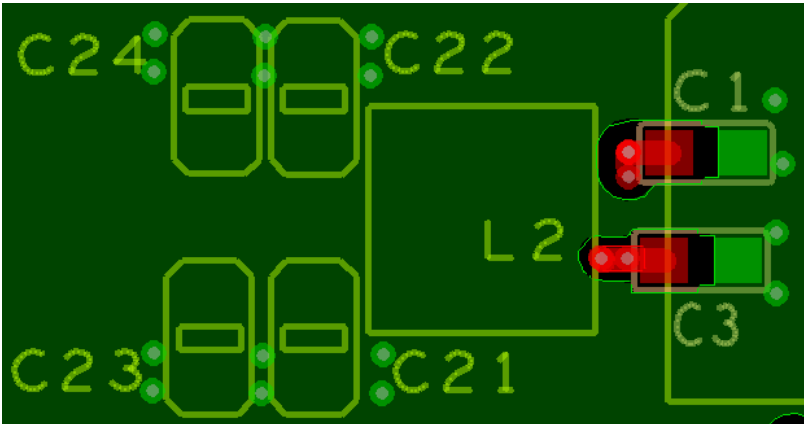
SW1AB layout - bottom layer components + top and bottom silkscreen
